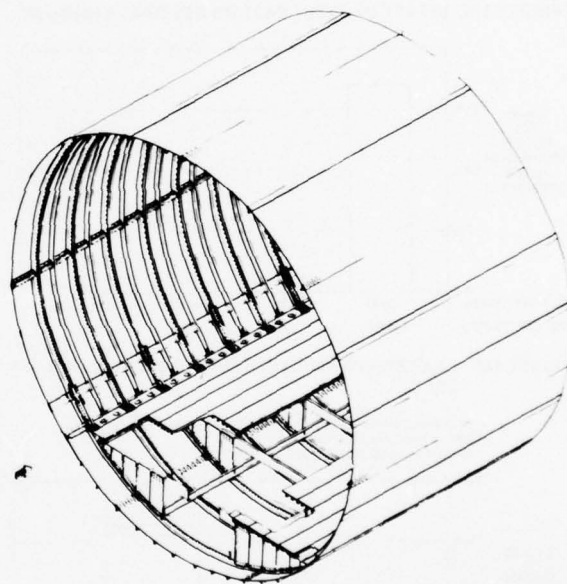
FSDC STRUCTURAL ARRANGEMENT
